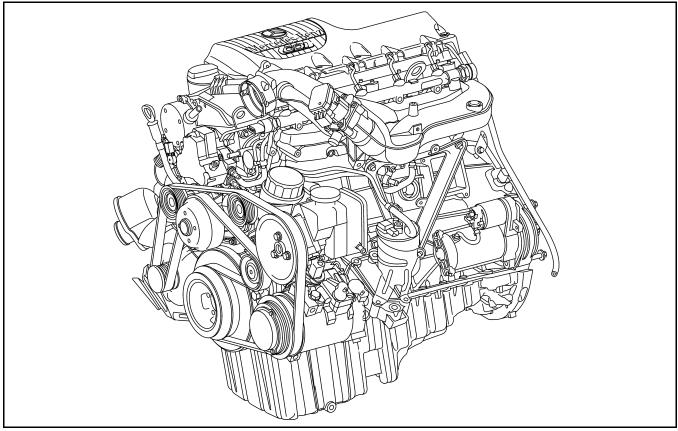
Sprinter 2.7 liter OM647 Diesel Engine
